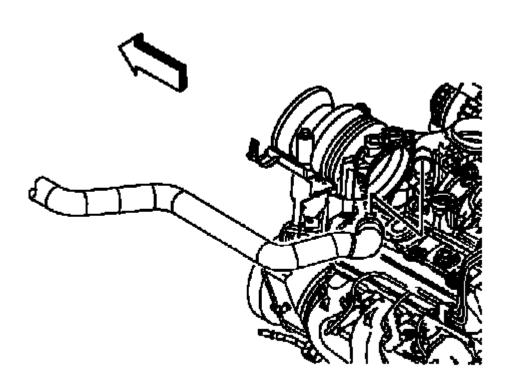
View Of Radiator Inlet Hose, Clamps & Thermostat Housing Courtesy of GENERAL MOTORS CORP.
